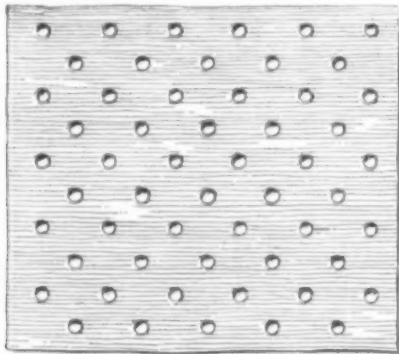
SECTION OF SURFACE OF COMMUNUTOR.
